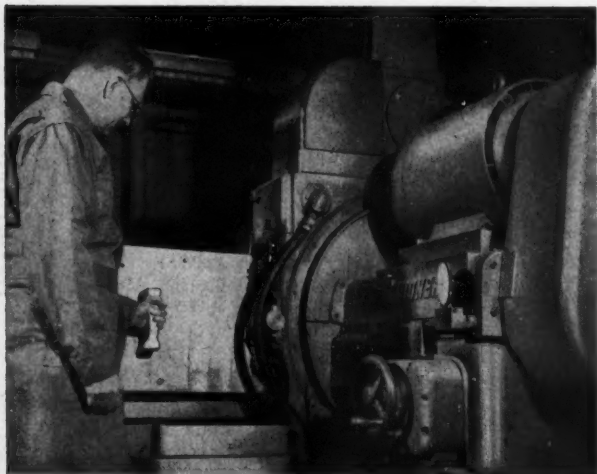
Gardner double-disc machine employed for grinding the faces of flat instrument parts to within 0.0005 to 0.001 in. for flatness and parallelism
